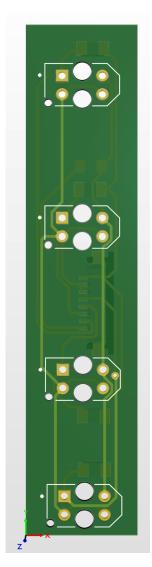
3D1 PCB 6: Magic Periphery Board
